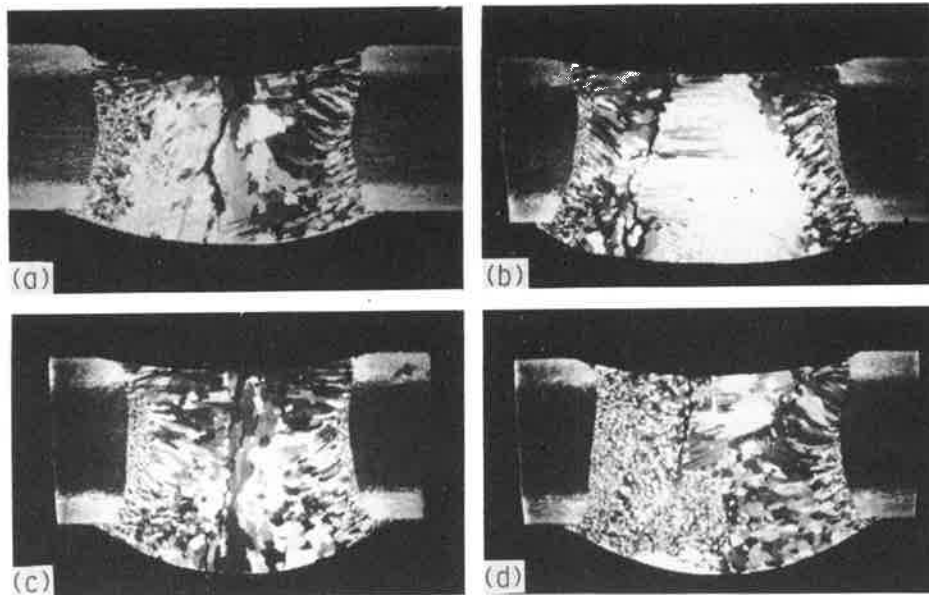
Macrostructures on cross-sections of 7N01 GTA weld beads; (a) without filler wire, (b) with 5356, (c) with 6MgTiB, (d) with 6MgZr
